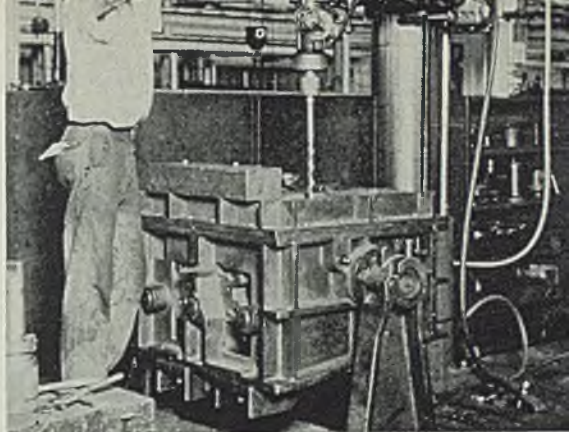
(above)—Turntable jig working on four sides of a spindle carrier. Fig. 6 (below)—Planer used for planing several milling machine bases at one setting—one of few planer operations
